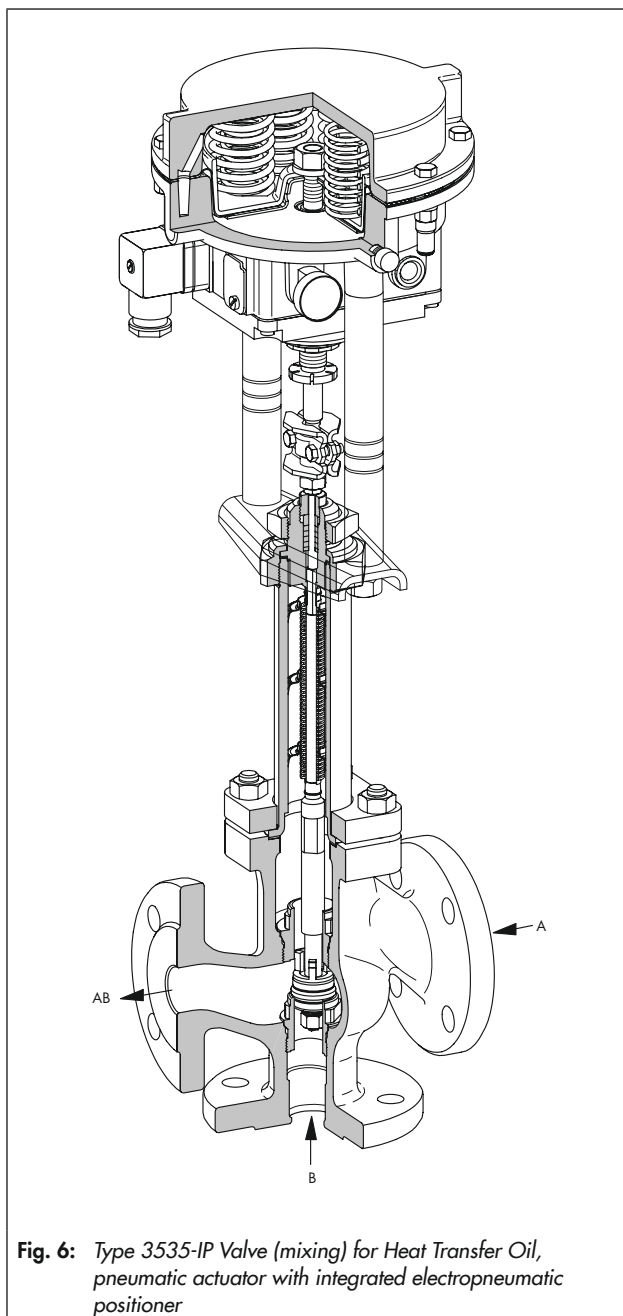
Type 3535-IP Valve (mixing) for Heat Transfer Oil, pneumatic actuator with integrated electropneumatic positioner
